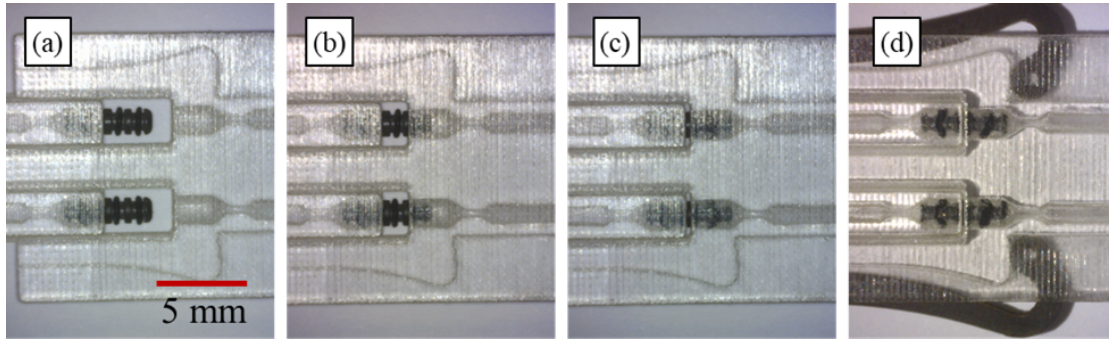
Assembly of the spring-based solution. (a) Sliding between drivers, (b) insertion of the seal fitting in the sample housing channel, (c) seal fitting inserted and (d) interconnection closing with the spring. The samples in the picture have the radial seal hydraulic interconnection.
